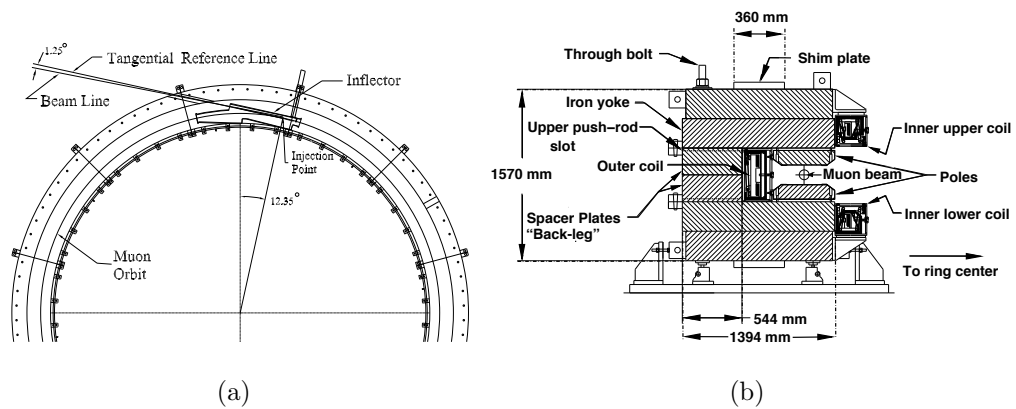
(a) Plan view of the beam entering the storage ring. (b) View of the storage ring cross section.
